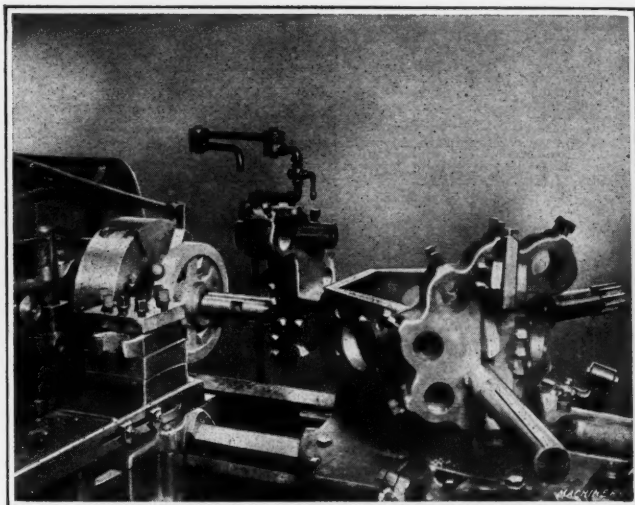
Machine engaged in taking the Finishing Cuts on the Gear Faces
